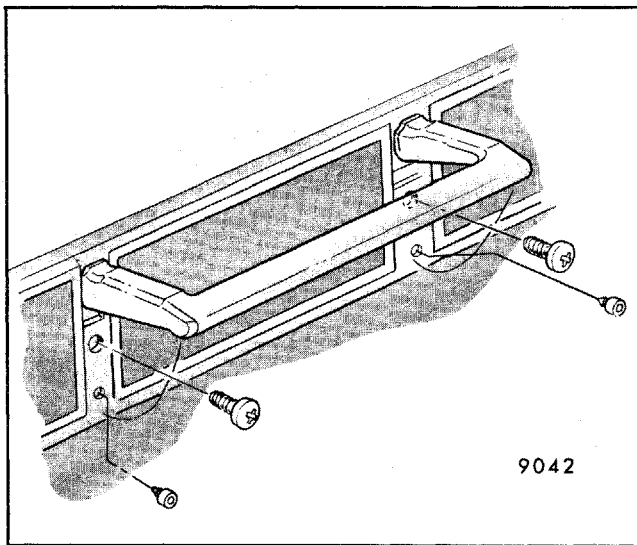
Typical Door Pull Handle Attachment - Buick 4BZ37 and "C" and Cadillac "E and K" Styles
